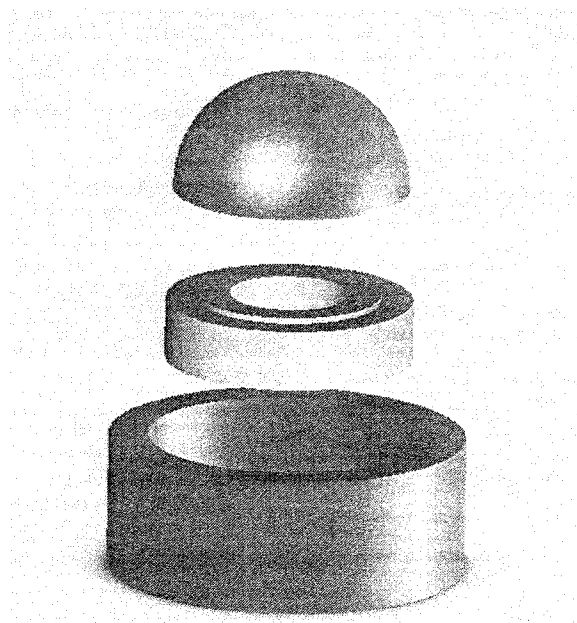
6 A 3-D view showing the arrangement of the sputter head set-up.
